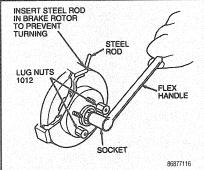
Before removing the hub nut and washer, insert a steel rod in the rotor to prevent it from turning
